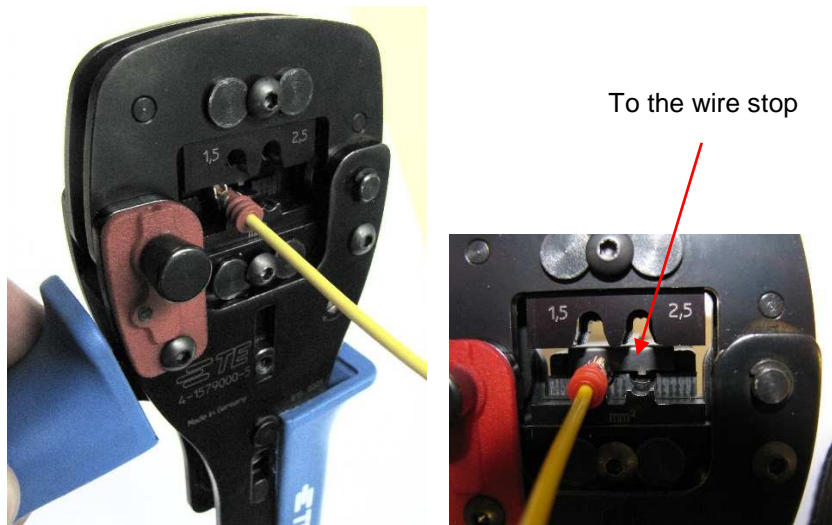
Inserting wire including sealing ring up to the wire stop point (left), wire stop point (right)
